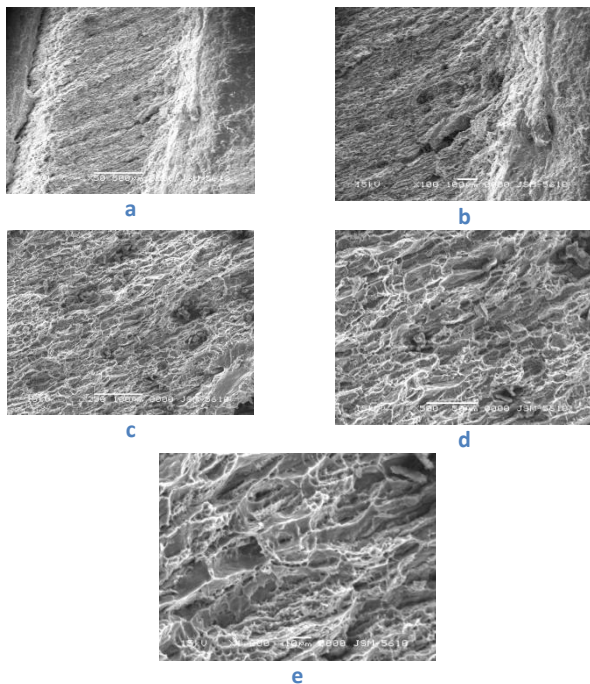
Fractrograph of weld sample prepared at 1070 rpm tool rotation speed and 120 mm/min welding speed a. 50x b.100x c.250x, d. 500x, e. 1000x magnification
